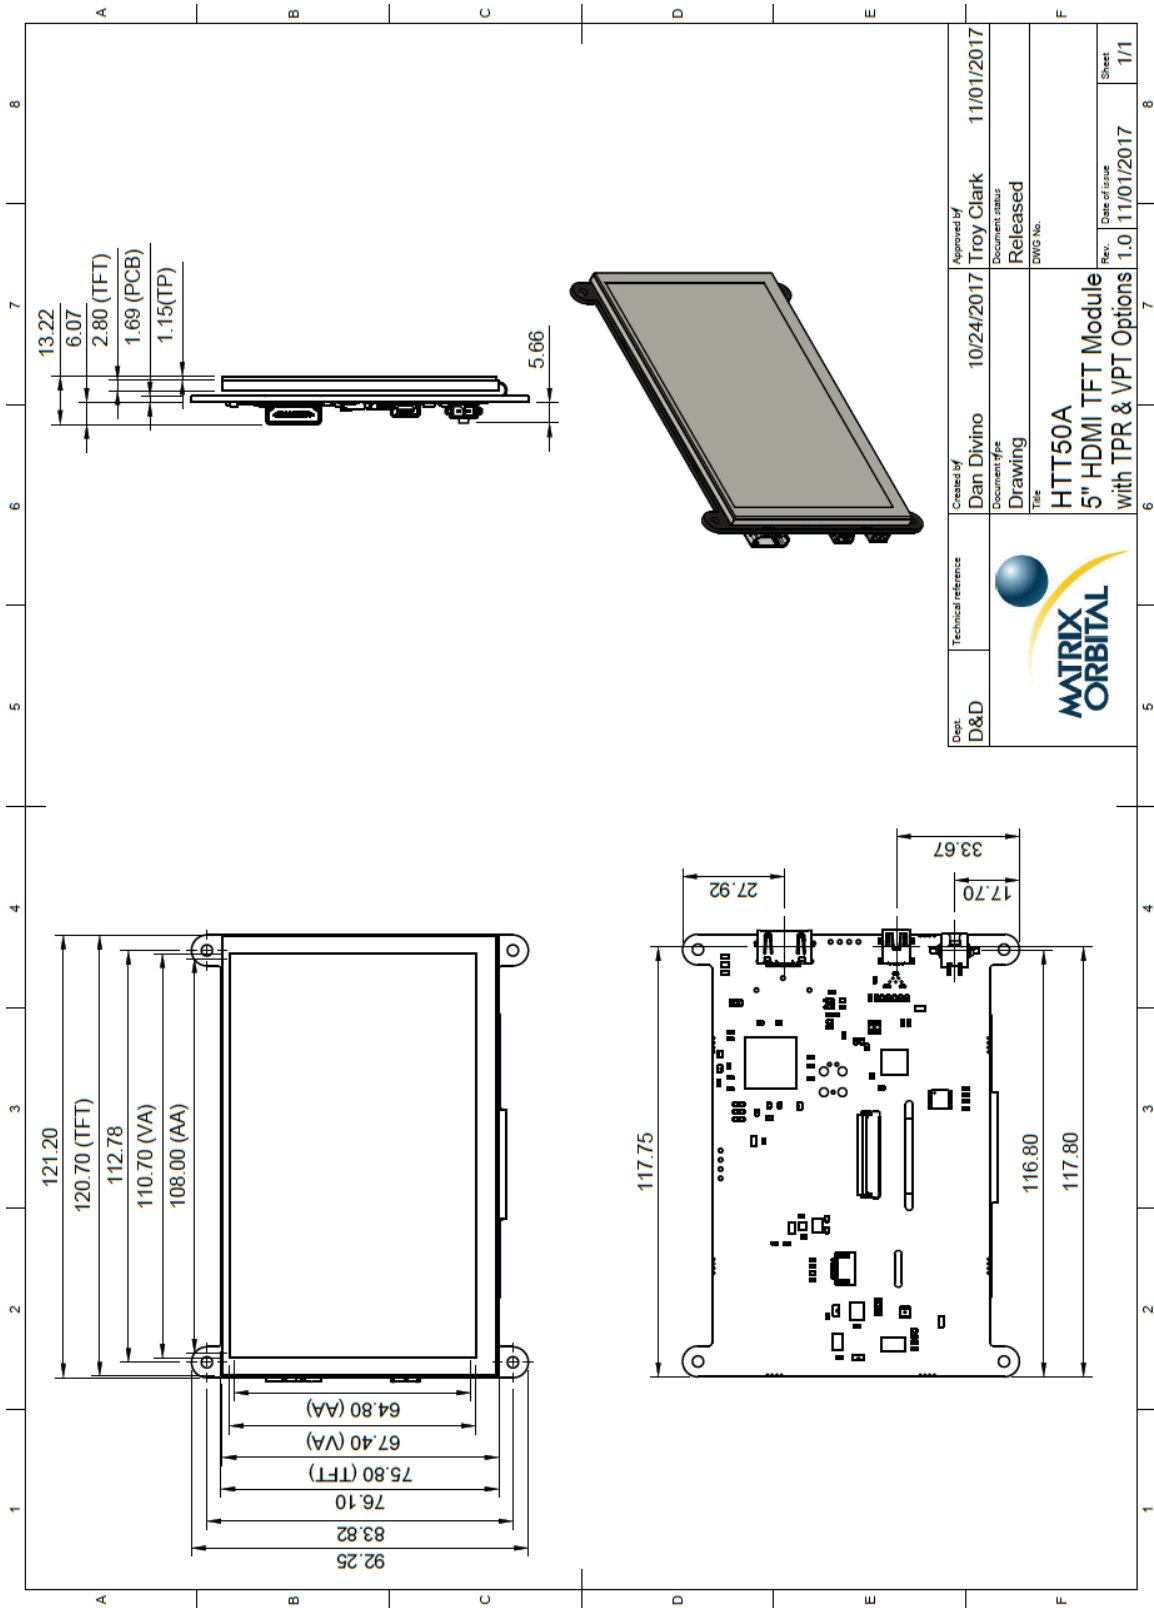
Resistive Touch Panel HTT50A Dimensional Drawing
